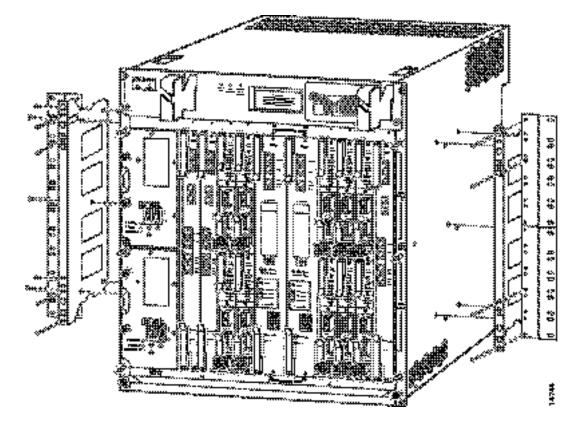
Attaching Flanges to Chassis in a 23-Inch Rack
